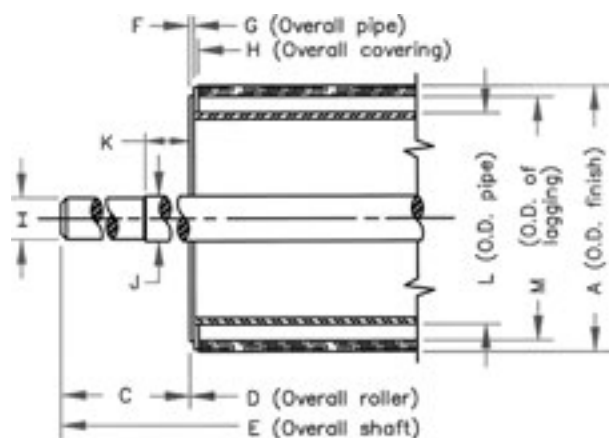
Sectional view of a ginning roller (see Tables 1a and 1b for dimensions).
